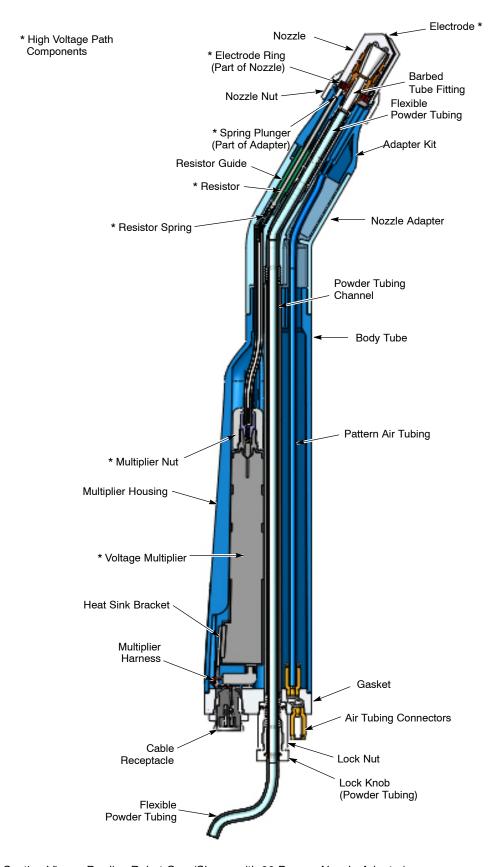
Section View - Prodigy Robot Gun (Shown with 30 Degree Nozzle Adapter)
